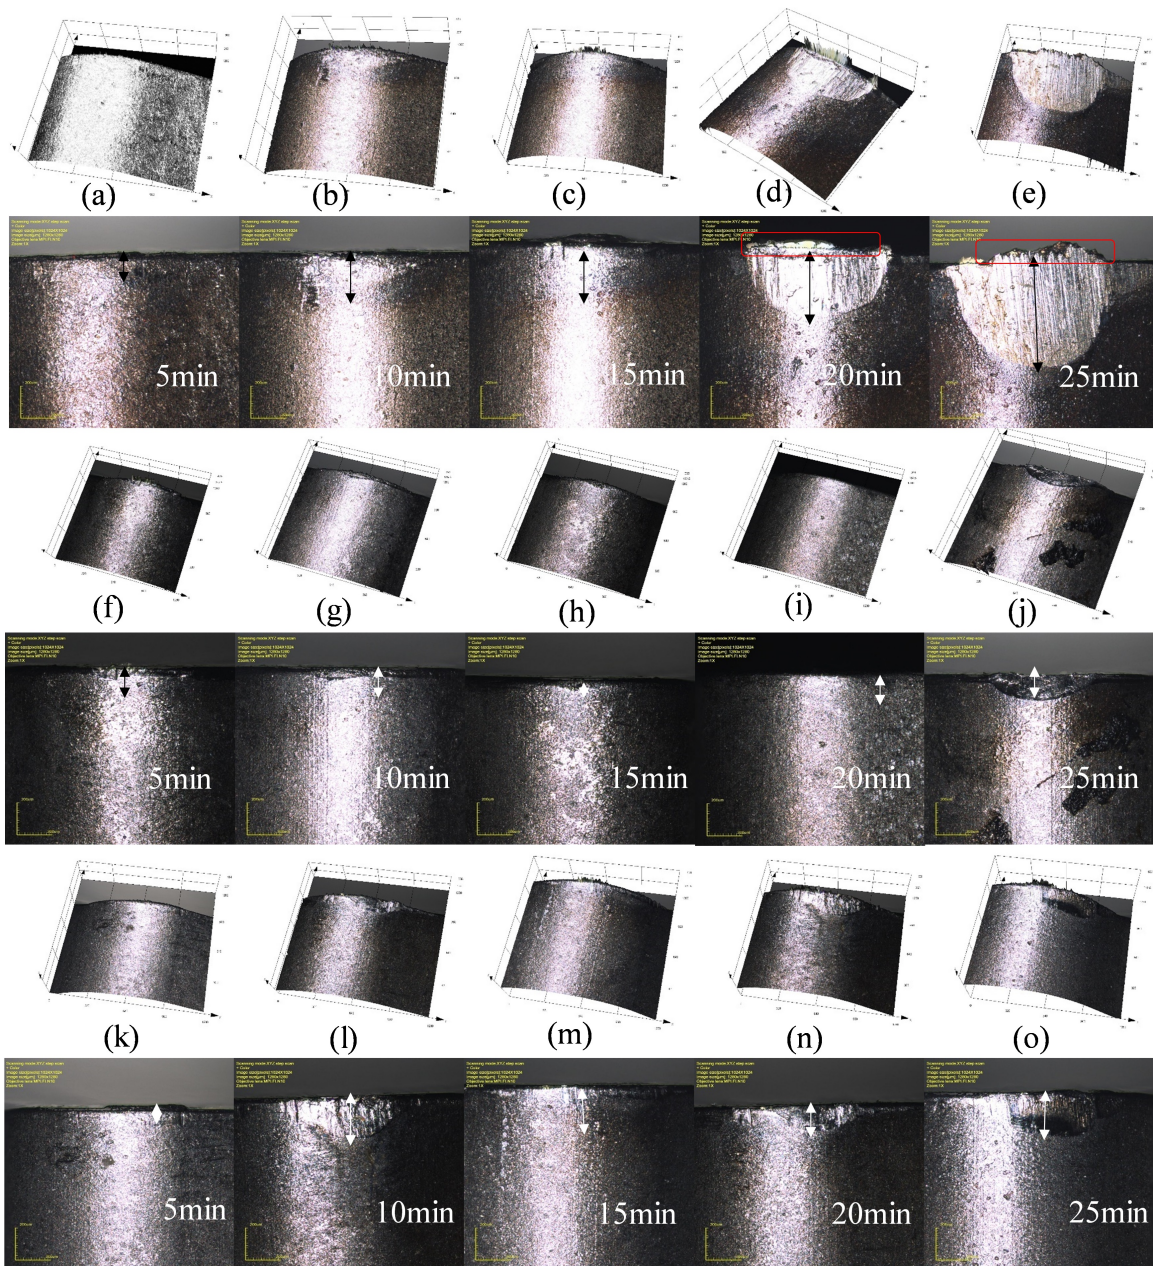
Tool wear measurements for (a-e) uncoated tool, (f-j) AlCN/AlC coated tool and (k-o) FeCrN coated tool
